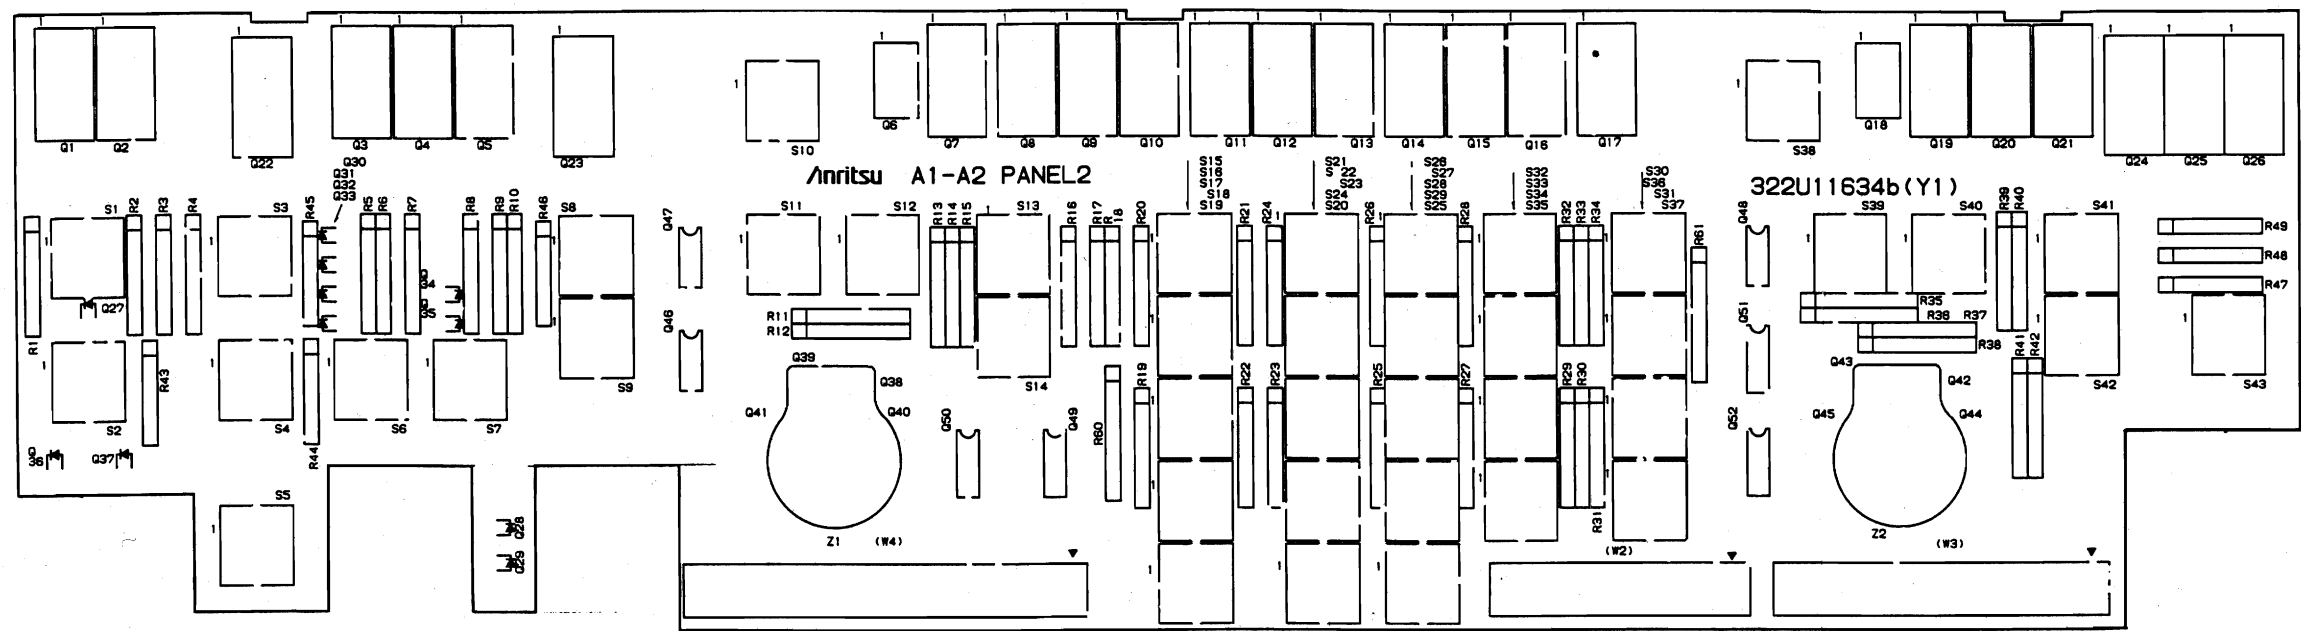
(1/2) A1-A2 PANEL 2 PC-Board Parts Layout (Parts Side) 4
